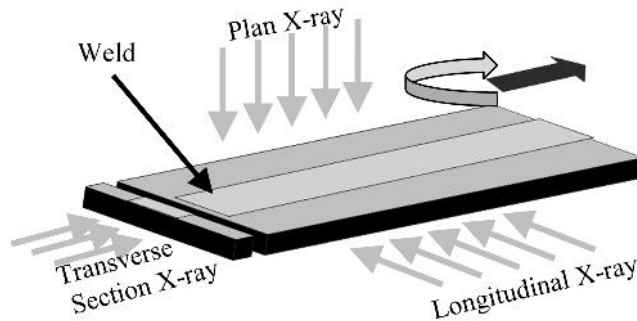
Layout directions of x-ray radiographs were taken of the weld region.
